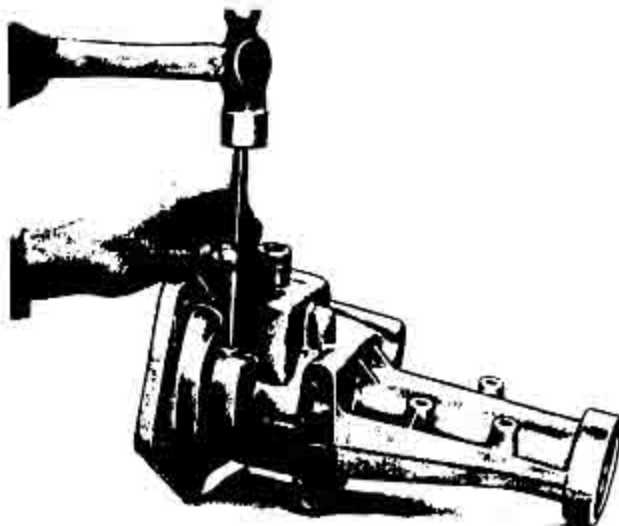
Removing Reverse Idler Shaft Roll Pin
